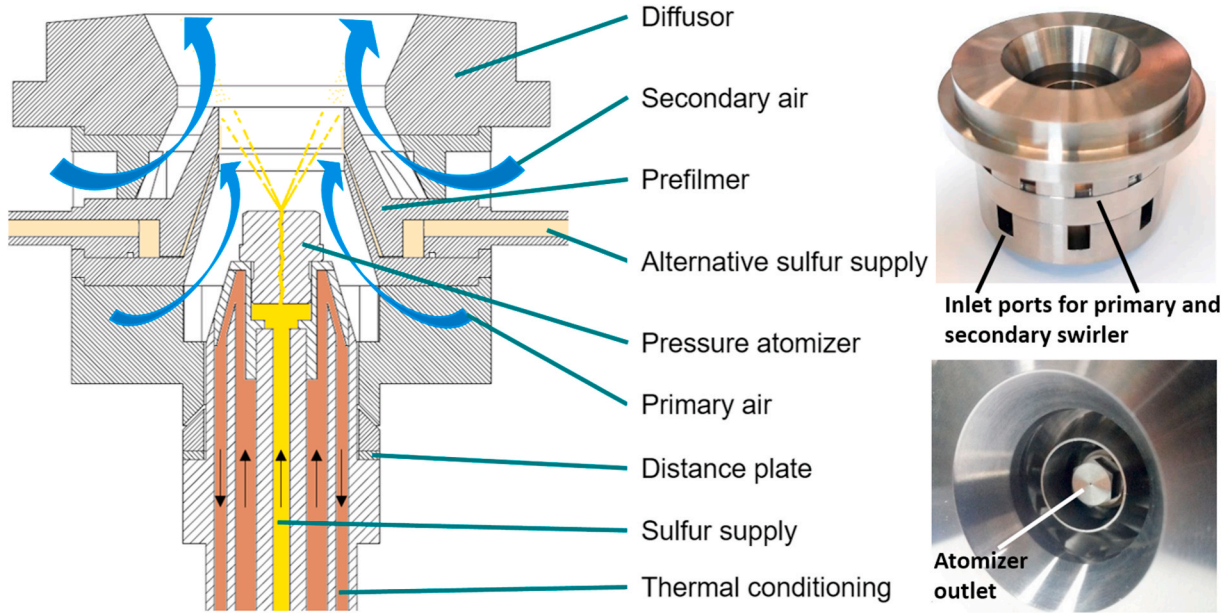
Cross-section view of the developed nozzle for combustion of sulfur (left) and photos of the real nozzle (right).
